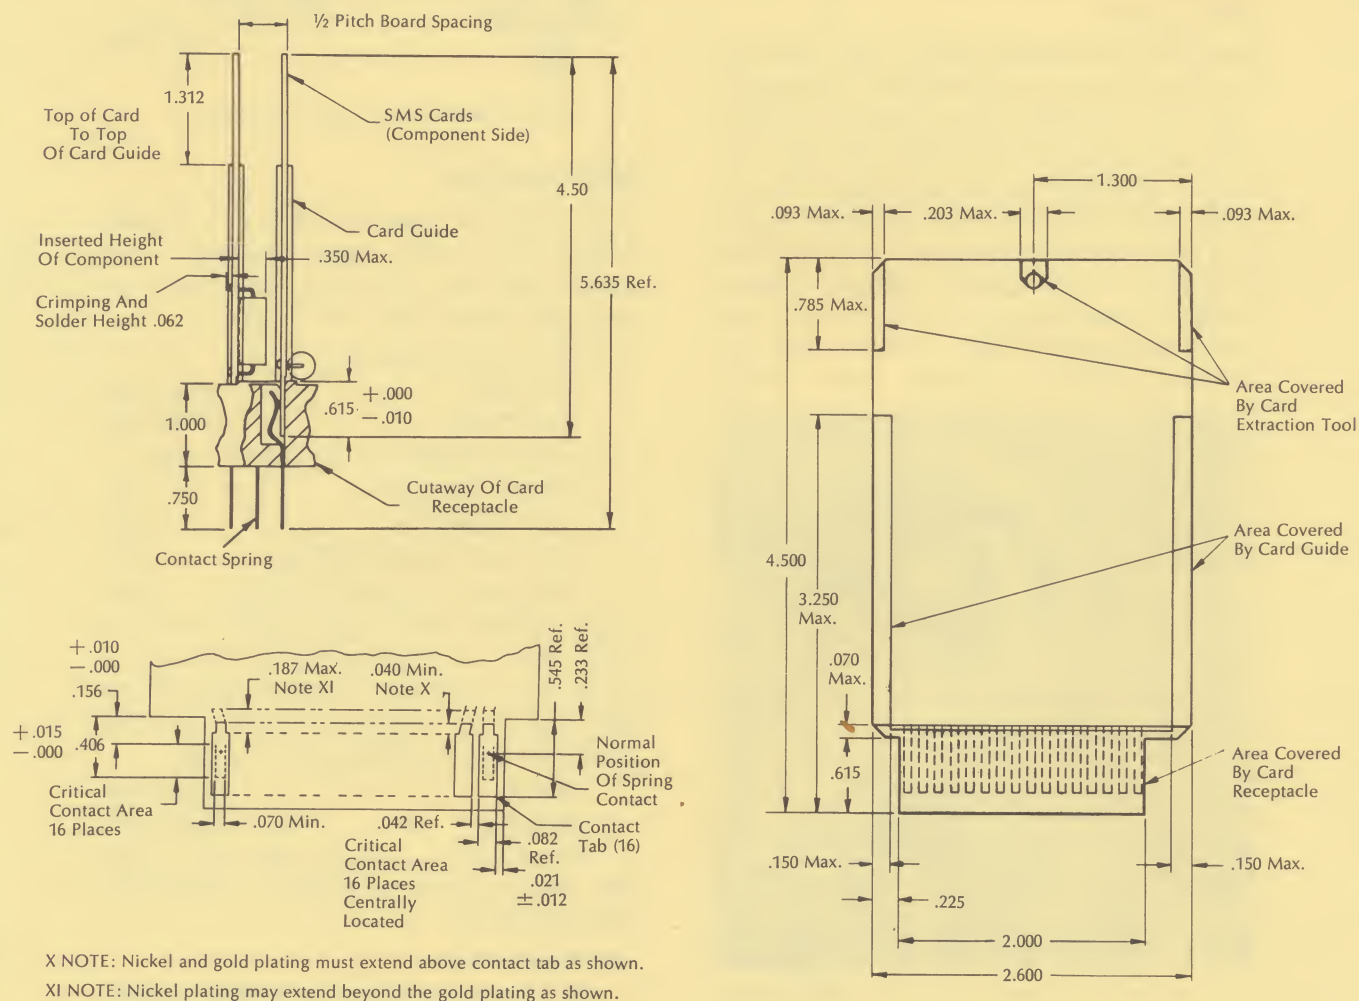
Single SMS Card and Card Socket Parameters (Card socket pin dimensions: .023 x .062)
